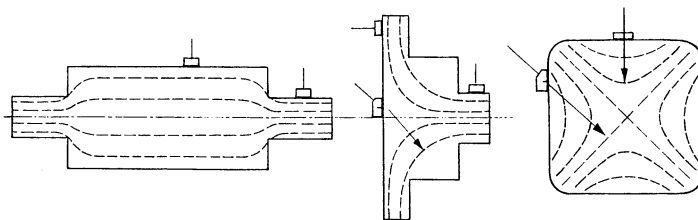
Grain flow of large forgings and optimum testing techniques
